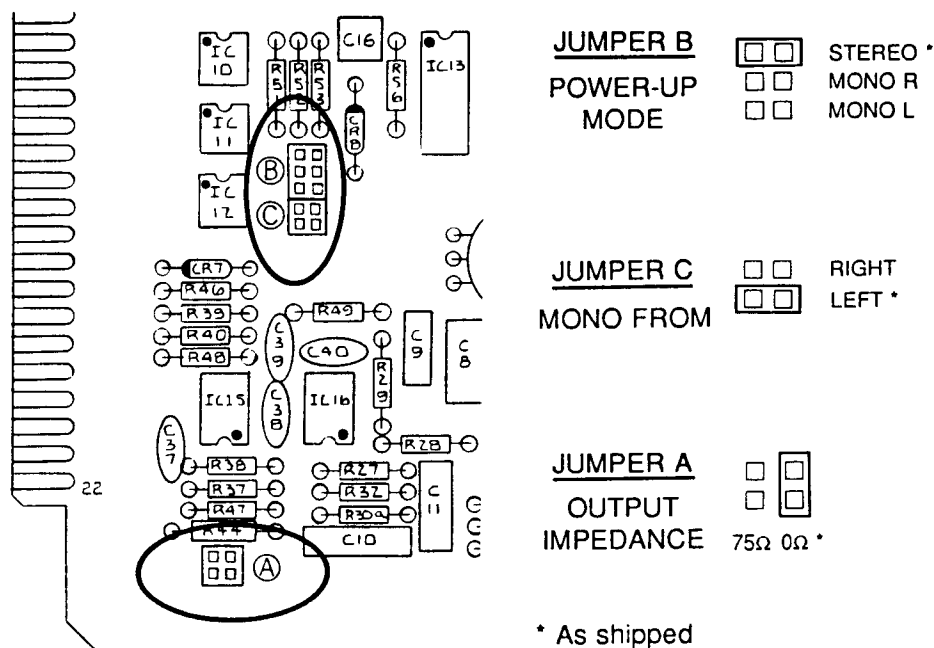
Jumper positions, 8185A Stereo Generator Card #7
